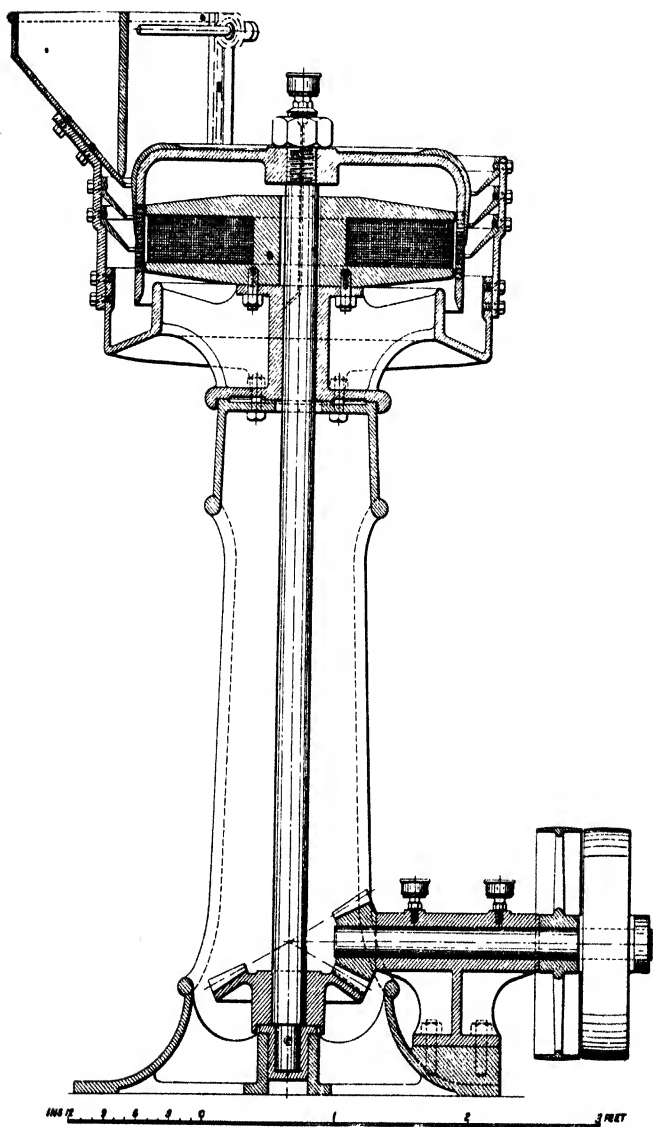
^a. Gröndal separator, type 2. Vertical section.
